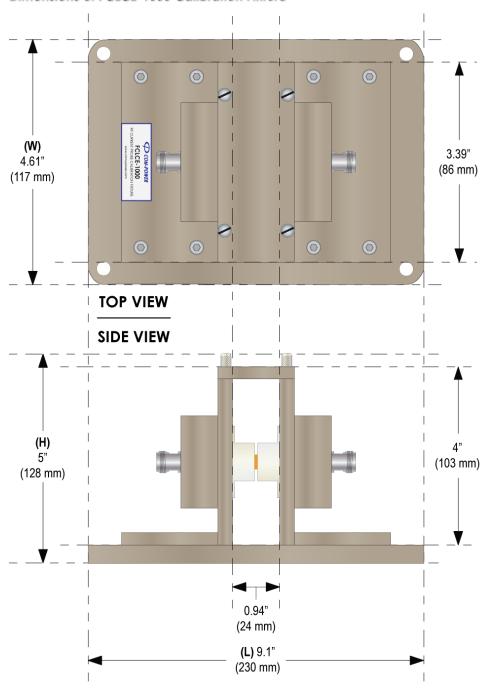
FCLCE-1000 Calibration Fixture Dimensions
